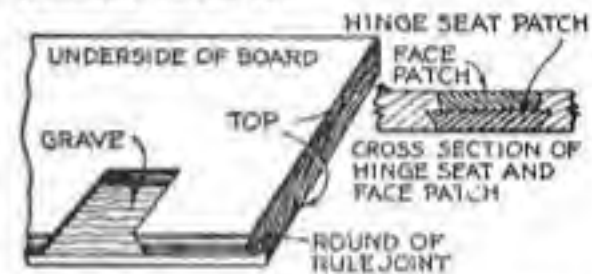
Typical table top defects, and an expert's method of patching the old hinge seats.
